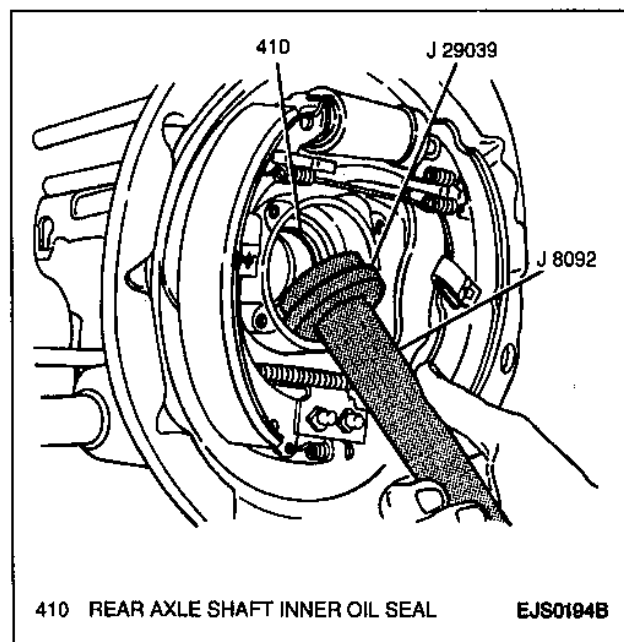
Installing Rear Axle Shaft Inner Oil Seal
